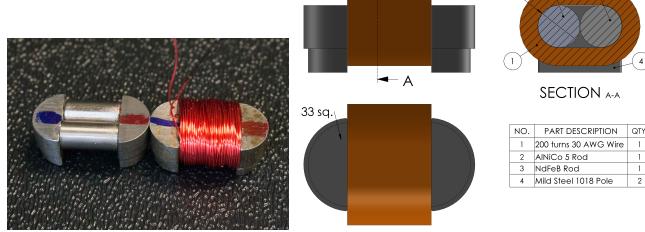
Left: EP magnets, before and after winding. Right: Technical drawing of EP magnet, dimensions in millimeters.
